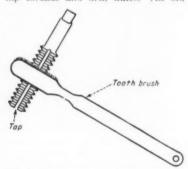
Tap threads and drill flutes can be cleaned after each use with an old tooth brush dipped in a solvent. Keeps tools in good condition.
